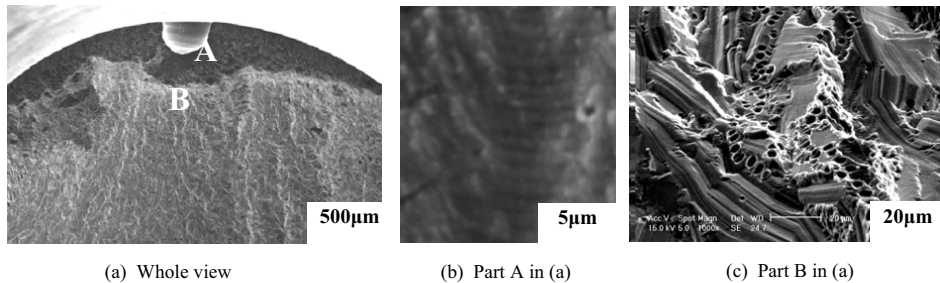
Fracture surface under ultrasonic fatigue in air ($\sigma_a = 124 \text{ MPa}, N_f = 4.20 \times 10^6 \text{ cycles}$)
